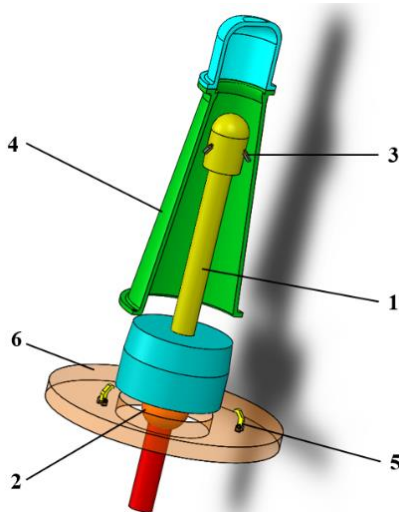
Mechanical concept inspired by STRONG mechanism. Probe (1), universal joint (2), petals (3), passive interface (4), hooks (5), flange (6).
